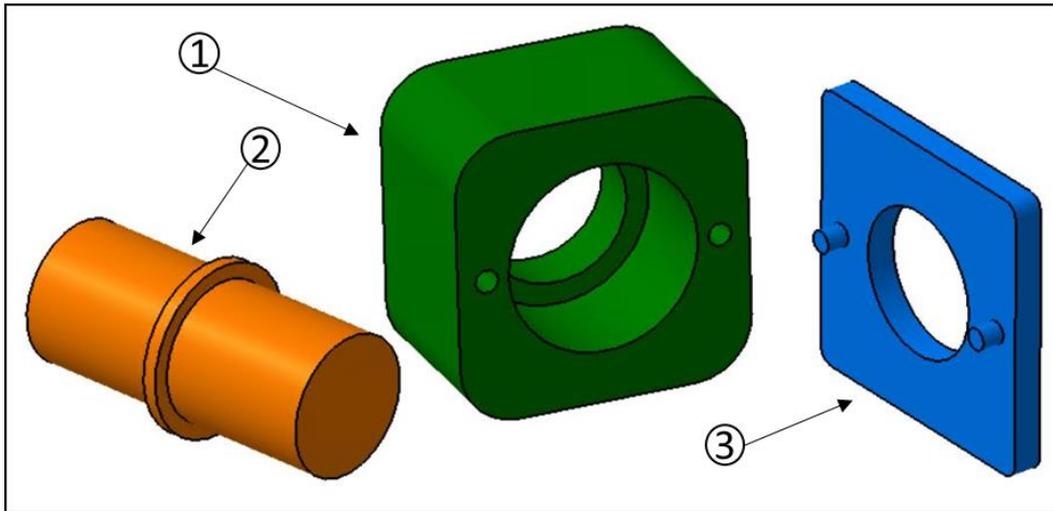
Mechanical assembly: 1 support; 2 shaft; 3 plate
